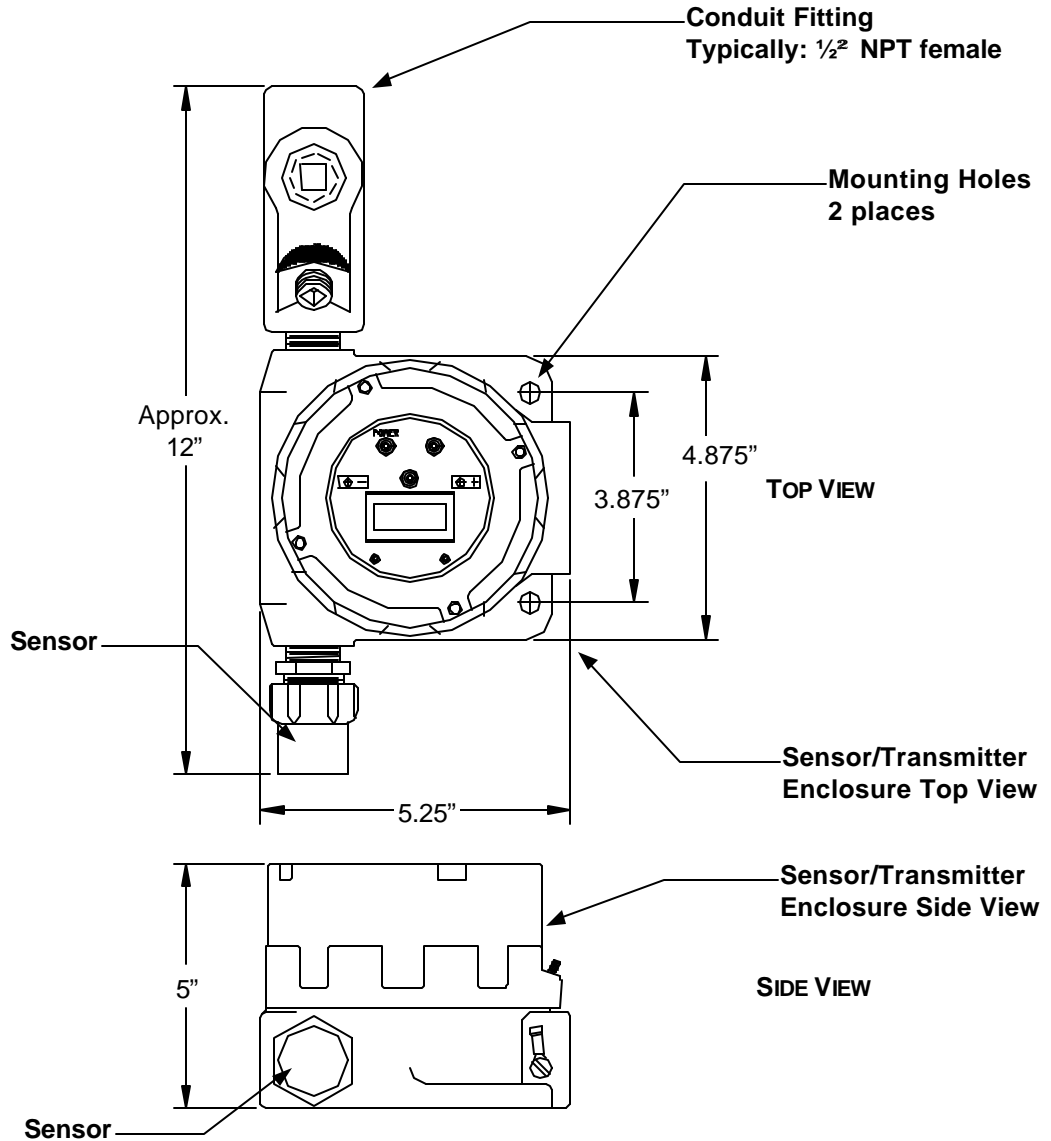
Mounting Dimensions of MOS Sensor/Transmitter
